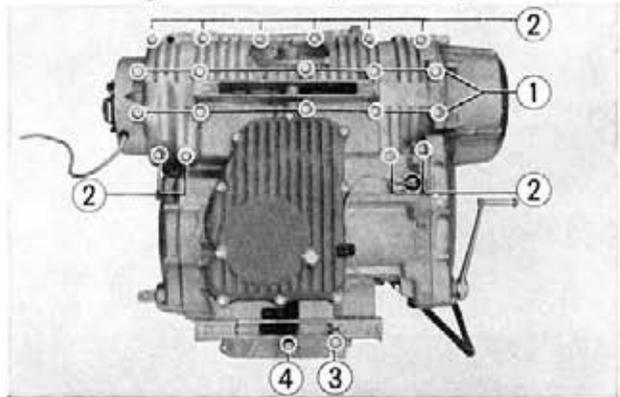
① 8mm bolts ② 6mm bolts ③ 10mm nut ④ 8mm nut
